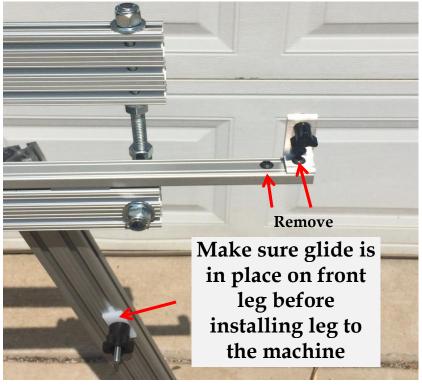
Slide the rail out a few inches and remove both  $\frac{1}{4}$ -20 cap screws
